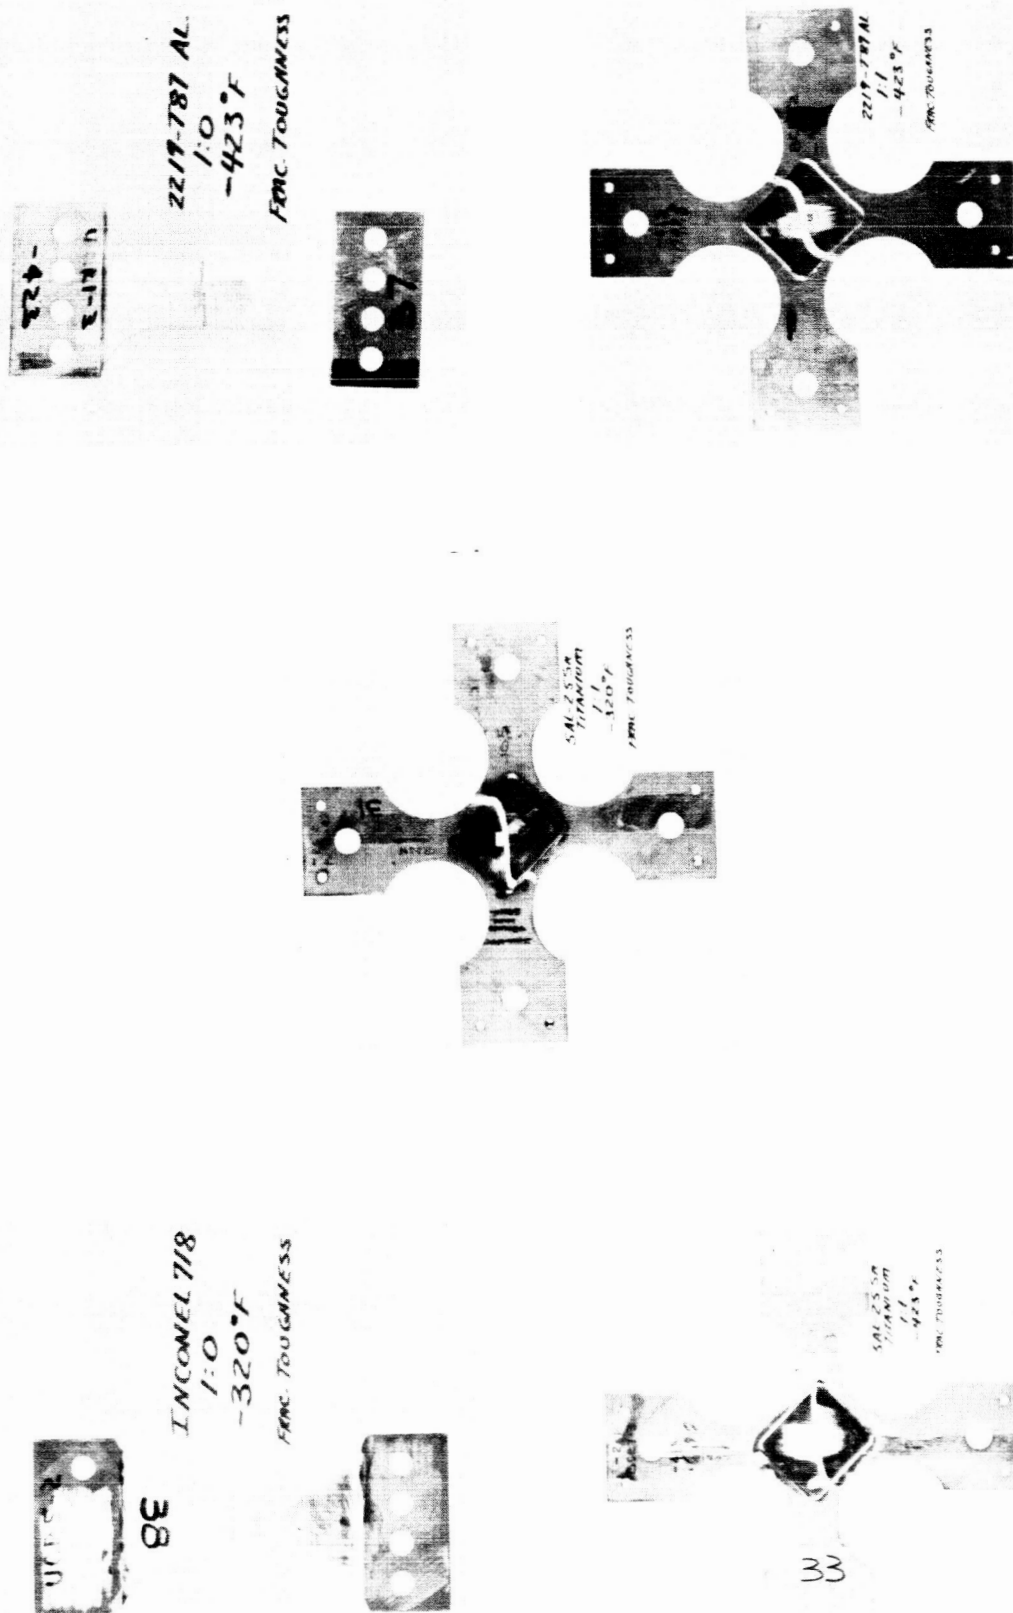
FAILED UNIAXIAL AND 1:1 BIAxIAL FRACTURE TOUGHNESS SPECIMENS
